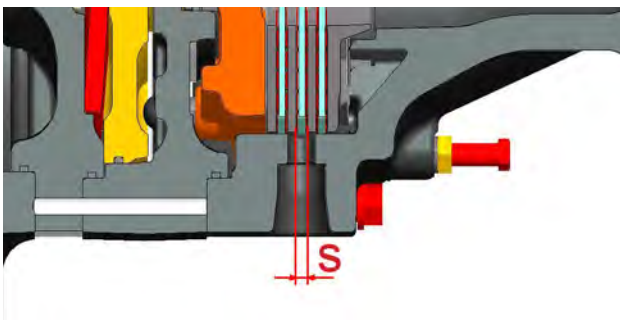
Checking brake distance with the T1 go / no-go gauge.
